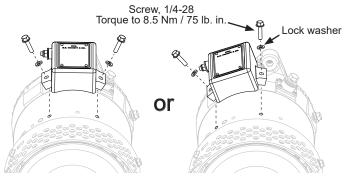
Regulator Mounting Location Options (anti-drive end view)
